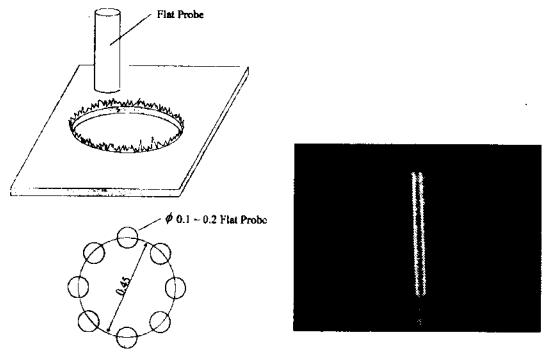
Burr measurement system with flat end probe with 0.2mm diameter
